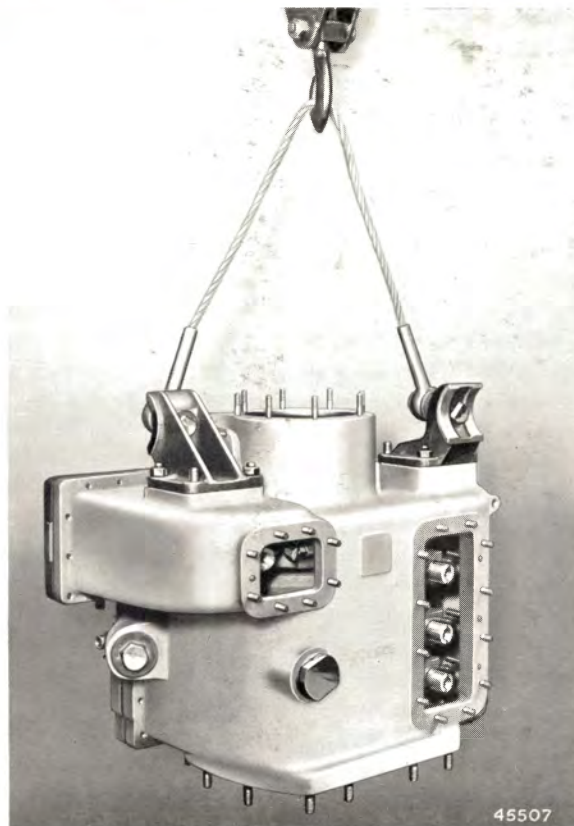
LIFTING THE GEAR CASE ASSEMBLY
